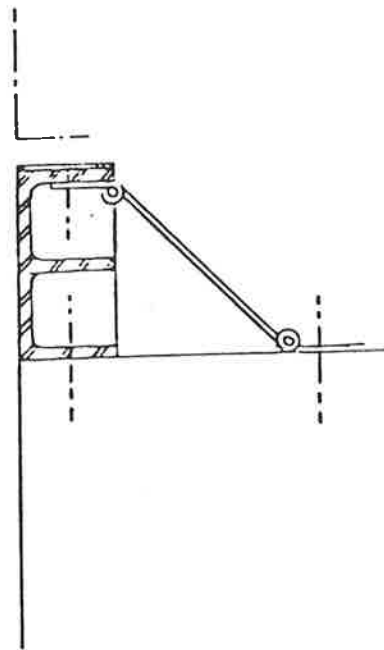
PASSIVE GAP FILLER DESIGNS
